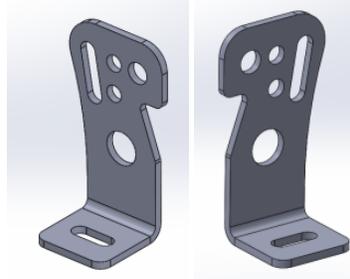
INSIDE VIEW OF FRAME MOUNTS
